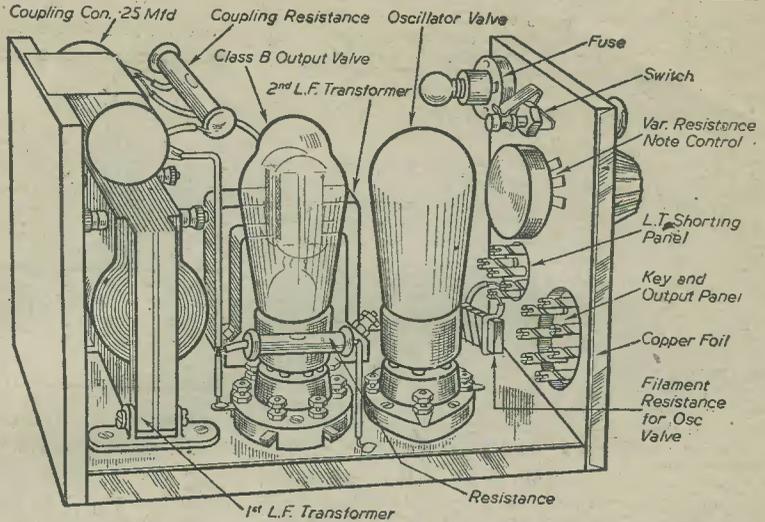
This is how the complete unit should look. A metal cover can easily be made to protect valves, etc.
